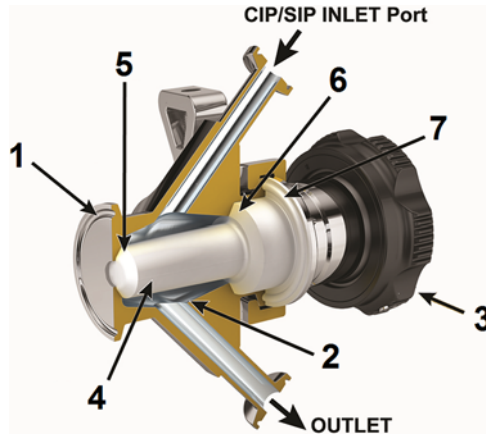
The sample valve is provided with (1) a ferrule for mounting to the outside of a tank or pipe by means of a hygienic clamp connection, although welding onto a short upstand is also possible. It is important that no dead leg is formed during mounting. The valve chamber (2) allows fast draining. Samples are taken by turning the handwheel (3) counterclockwise, allowing the plunger (4) enclosed by a rubber sleeve (diaphragm) (5) to be withdrawn from its seat. Once the sample is taken, the plunger can be moved forward on turning the handwheel clockwise, to finally make a seal with the valve body. In this closed position, the diaphragm sits flush against the inner tank wall or piping. *Courtesy of ASEPCO Corporation.
